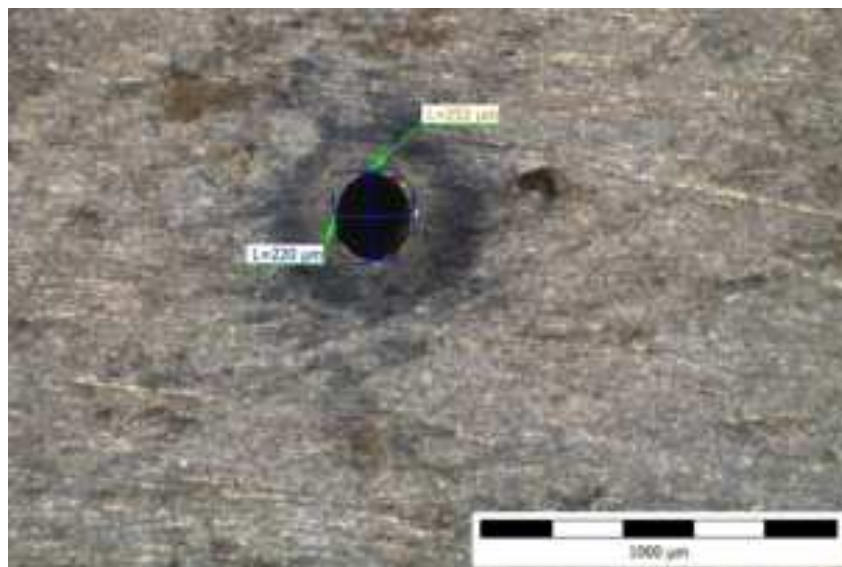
Dimensions of a drilled hole in a 2 mm thick steel plate
